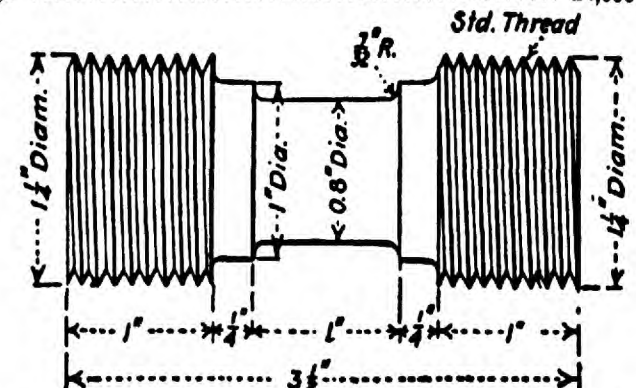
Standard Form of Test Specimen Required for Tension Tests of Gray-Iron Casting Material.
